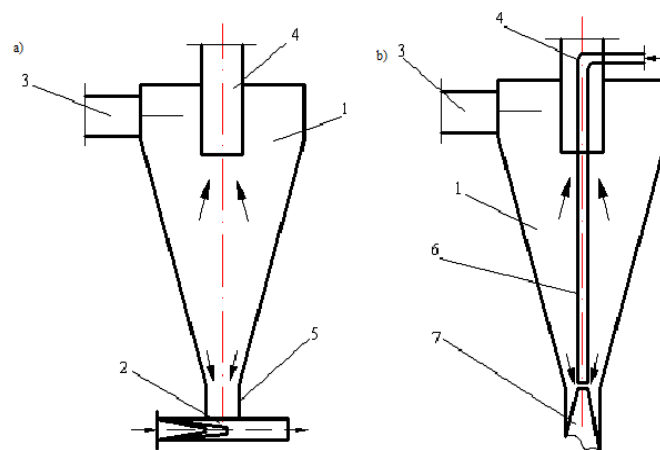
Vacuum hydro cyclones a) with transversal hydro elevator; b) with axial hydro elevator; 1-corpus of hydro cyclone; 2-hydro elevator; 3-inlet nozzle; 4-drain nozzle; 5-sandy pole ; 6-axial pressure pipe; 7-sandy nozzle (chamber of hydro elevator mixing)
